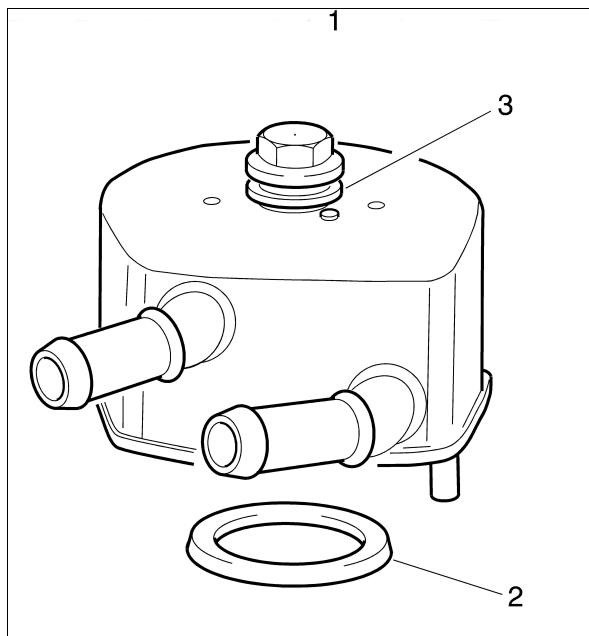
Oil Cooler (2000–2002 S-TYPE)
